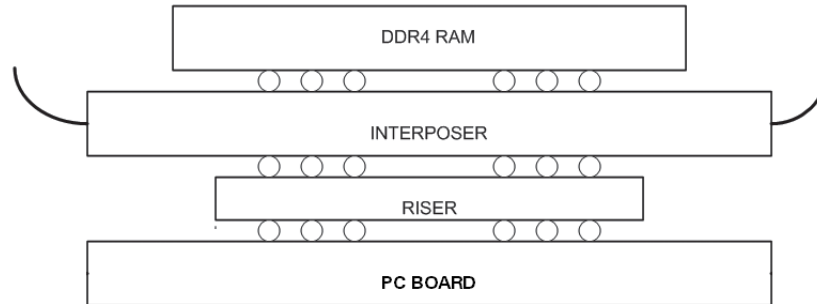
PC board, riser (or optional Grypper socket), interposer, and DRAM stack up
